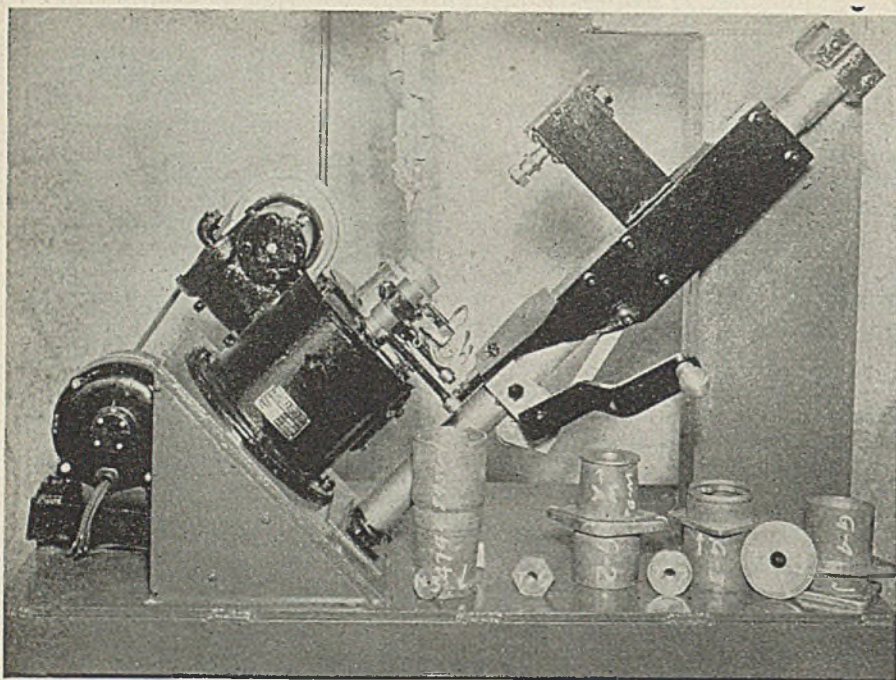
Closeup of custom-built fixture and drive for holding and rotating work during welding in machine, Fig. 5. Adapters for movable tail fixture (top right) are shown on base. These permit various types of work to be held and rotated in same fixture. Note handle operating cams controlling brush movement
